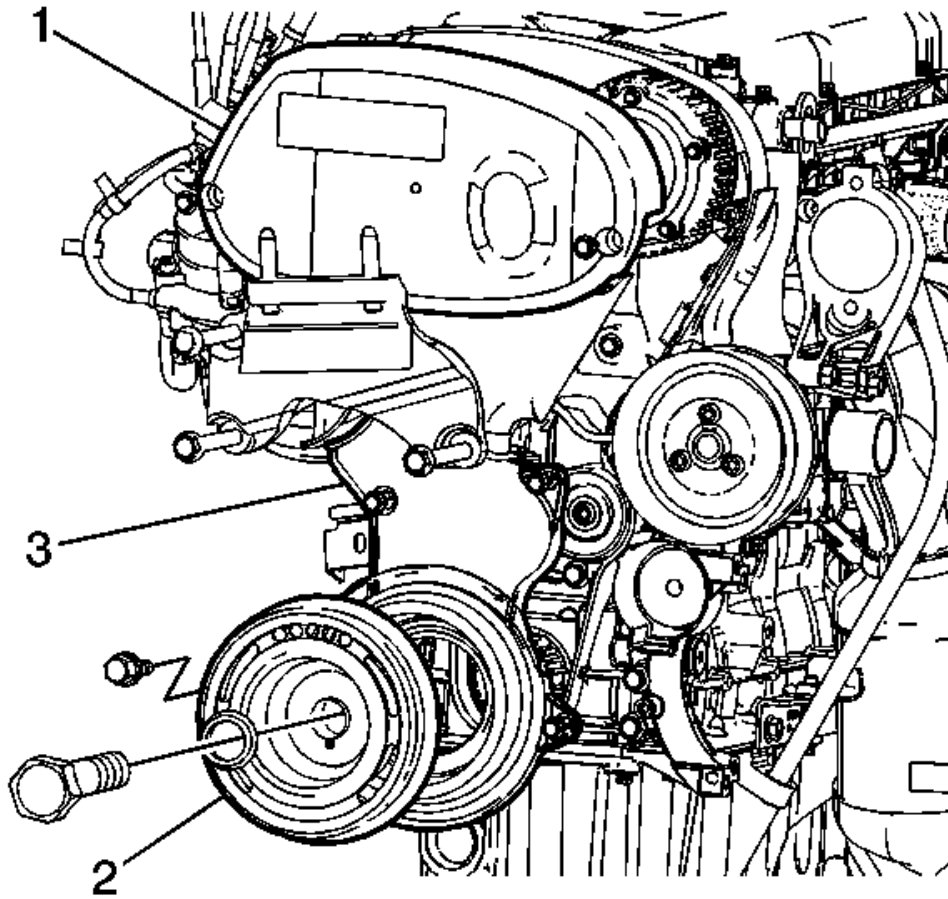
Crankshaft Pulley & Timing Belt Upper Cover
